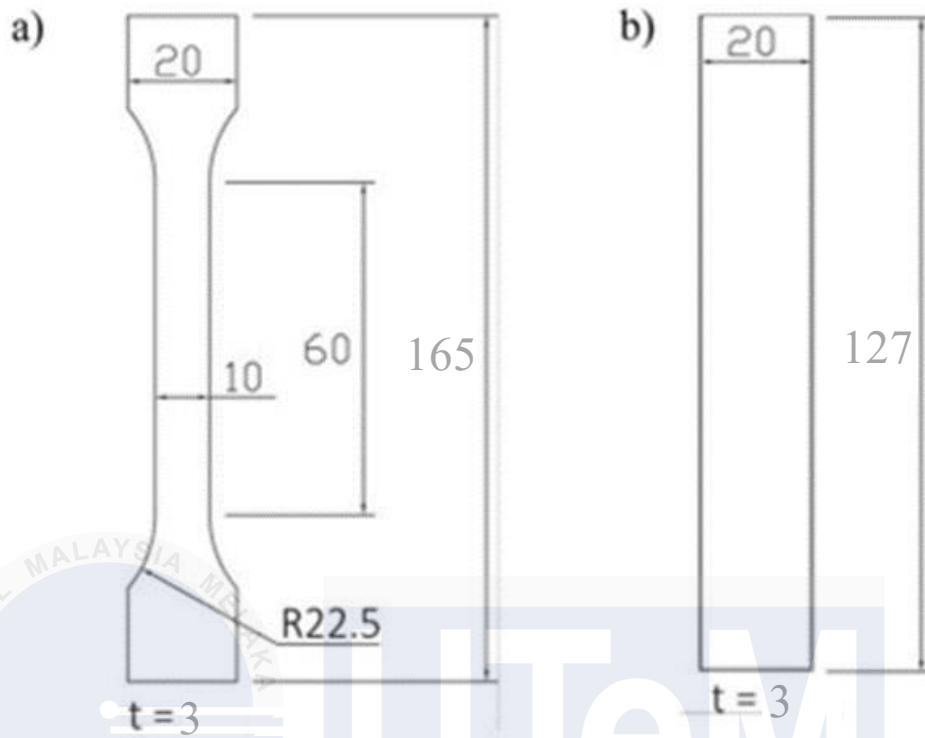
Specimens' dimensions of a) tensile test and b) flexural test
